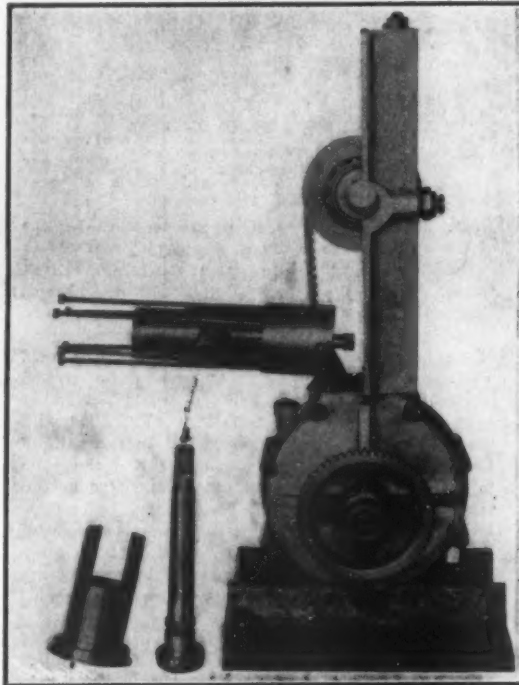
Motor With Half of Cylinder and Rotary Valve Removed.
